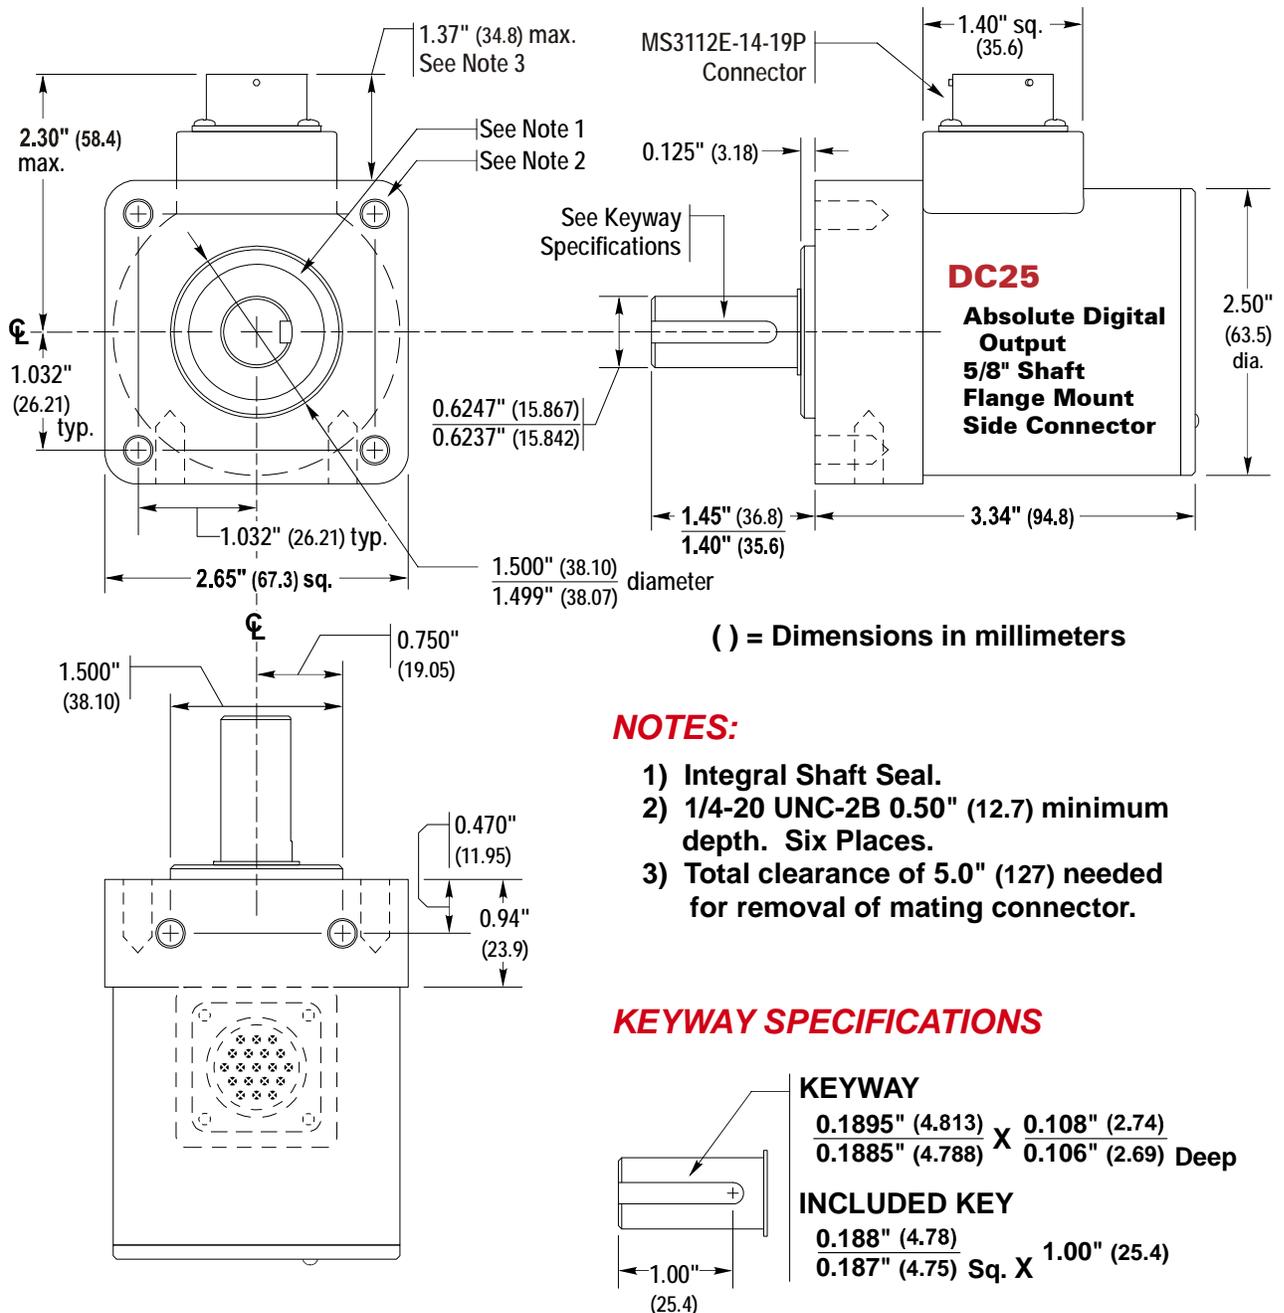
Flange Mount, Side Connect Outline Drawing
